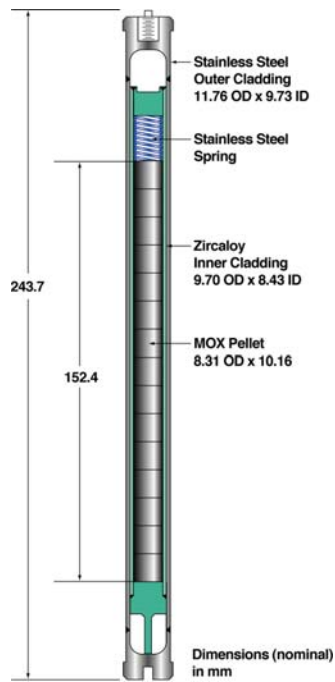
Each capsule assembly contains one Zircaloy fuel pin with 15 fuel pellets.
